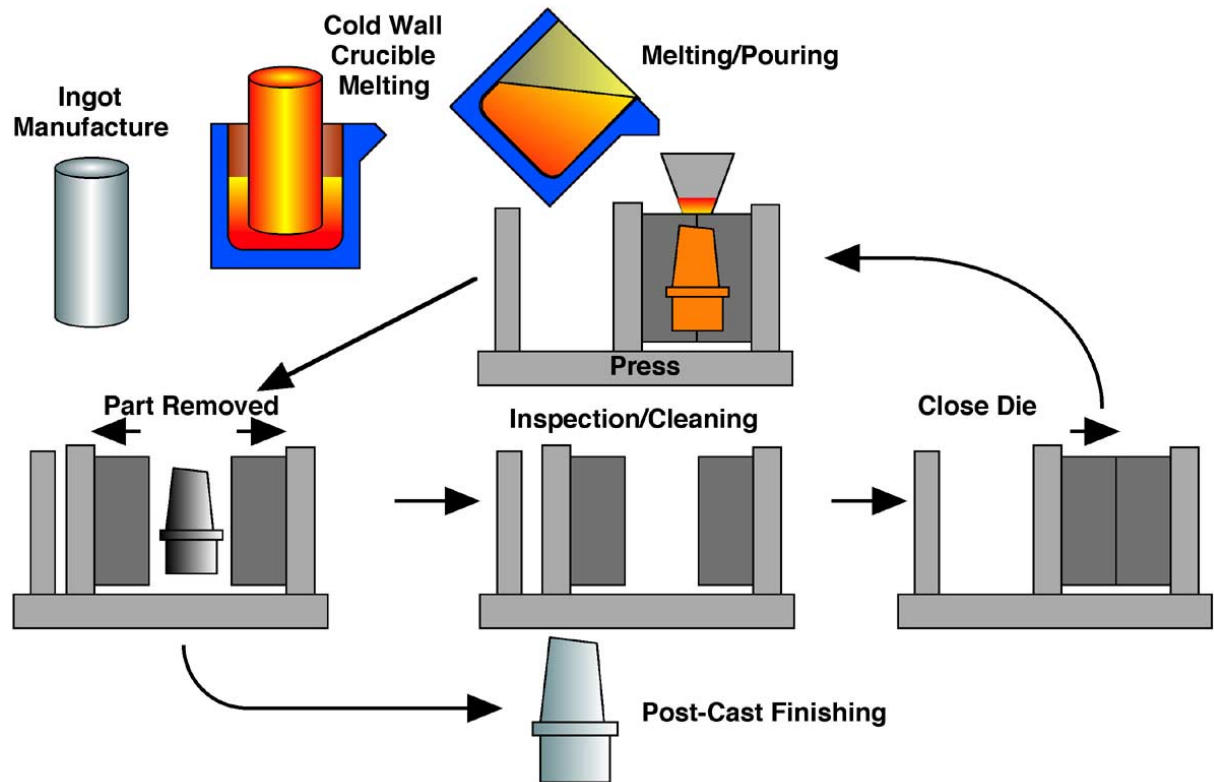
Typical Casting Sequence Showing Reusable Metal Mold.
